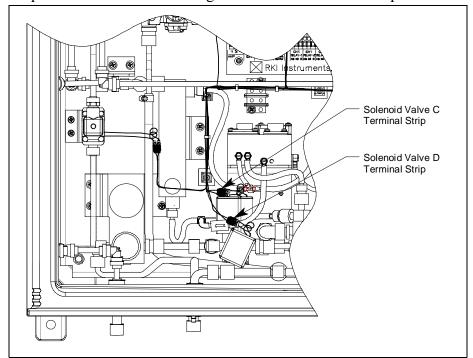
Disconnecting the Solenoid Valve Wiring for Aspirator Replacement
